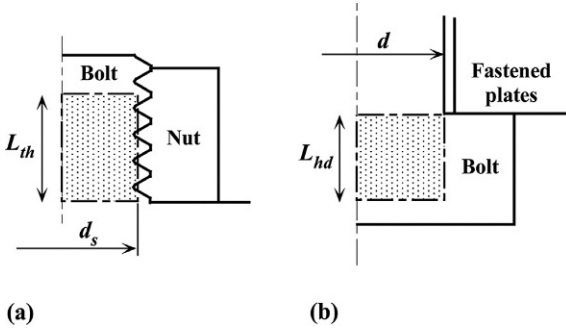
Equivalent lengths of engaged threads and bolt head. (A) Engaged threads and (B) bolt head.
